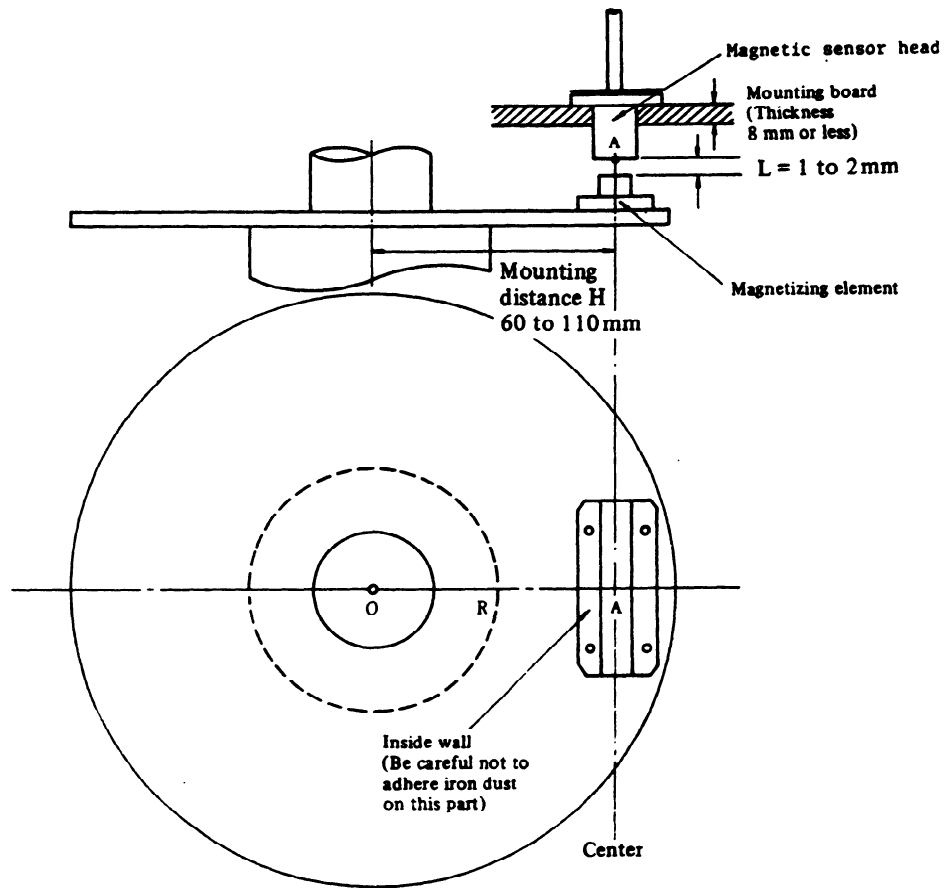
(c) Magnetic sensor mounting example (3) (When mounted on disk)
